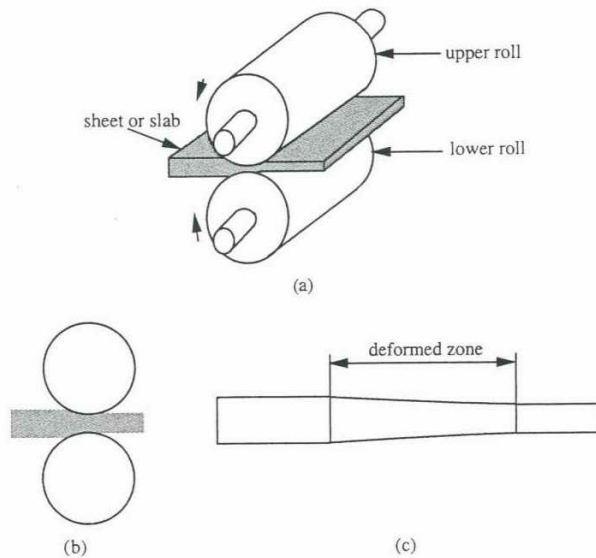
Flat rolling: (a) general, (b) cross section for slab rolling, (c) cross section for rolling strip [94].
